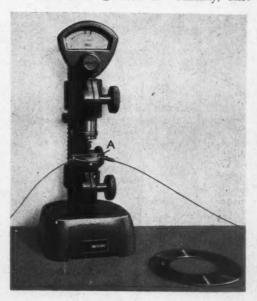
This Mercer Abramson comparator, used for checking the thickness of strip stock, can be read directly to 0.0005 mm. (0.00002 in.)
